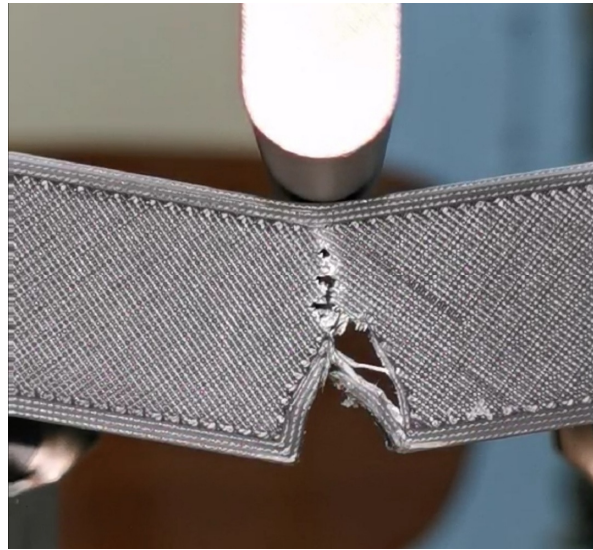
SENB specimen with three outlines, shown during the fracture toughness test
